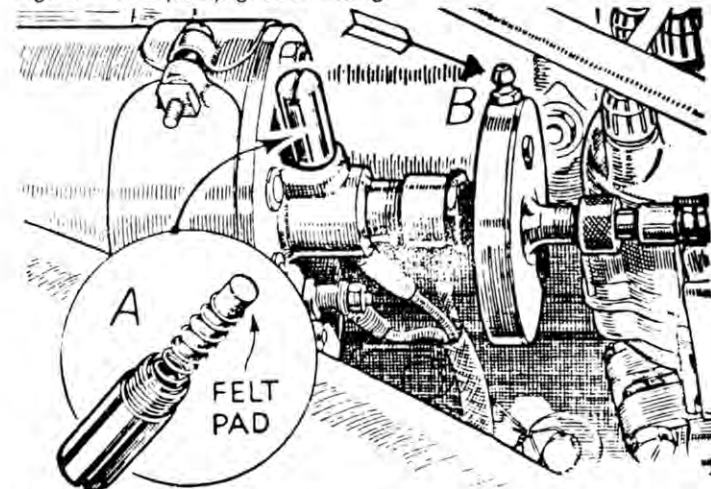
Lubrication points on the generator (A) and the tachometer drive (B).
